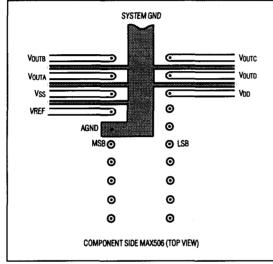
Suggested MAX506 PCB Layout for Minimizing Crosstalk
